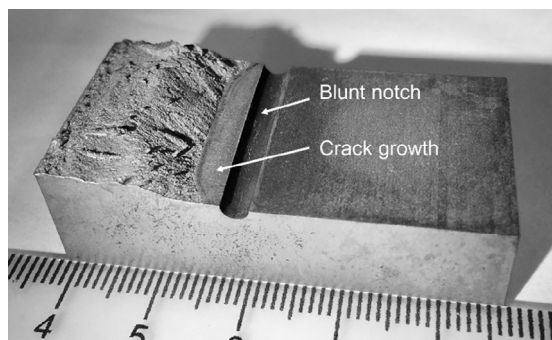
Fracture surface of blunt notch specimen after testing. Nominal displacement rate of 4.0×10^{-5} mm/s.
